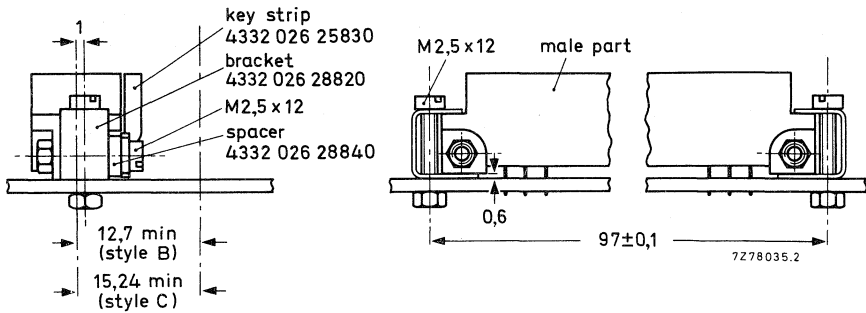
Key strip mounted to a male part with straight dip-solder pins.
